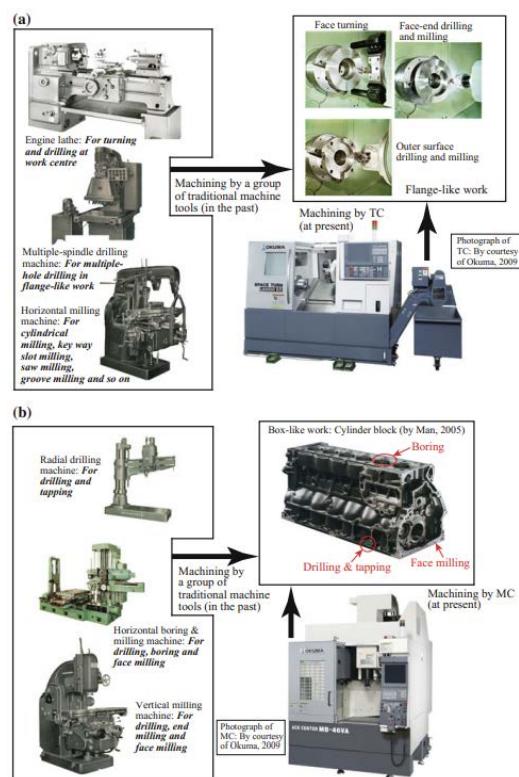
Integration of machining on traditional machine tools with machining centers (TC-turning centre, MC-machining centre)
